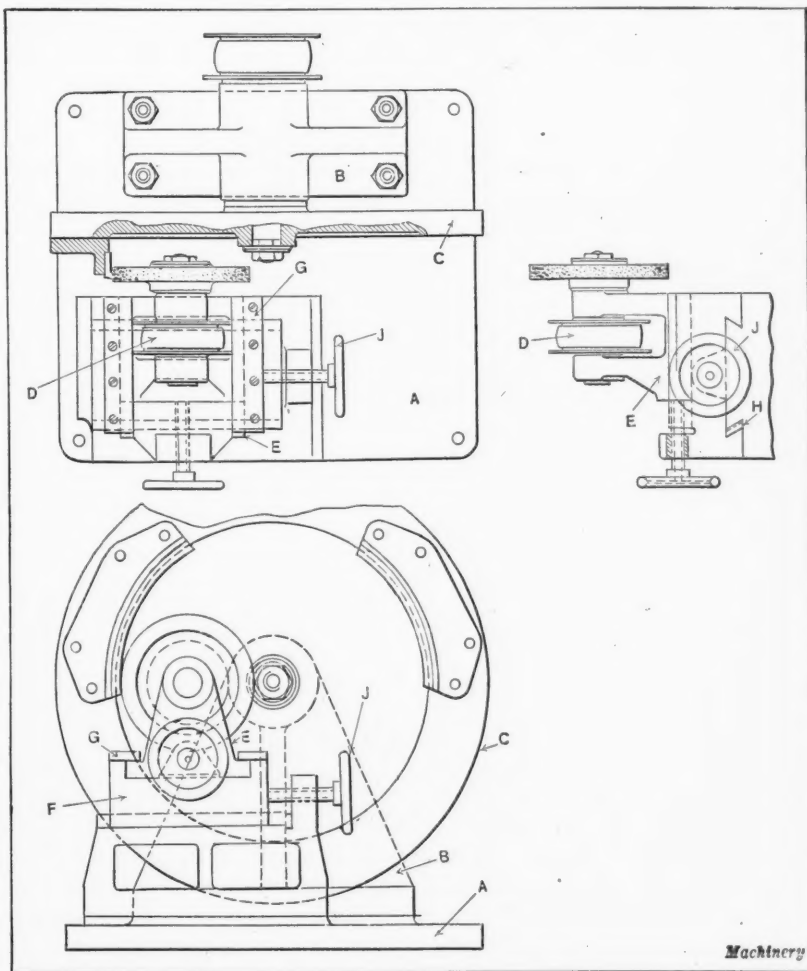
Design of Fixture in which the Lower Die Blades are ground
